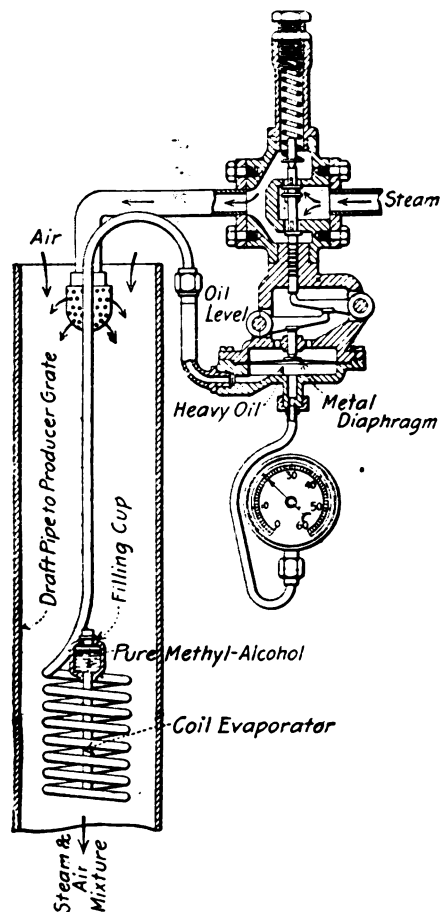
REGULATOR OF STEAM SUPPLY TO PRODUCER.
